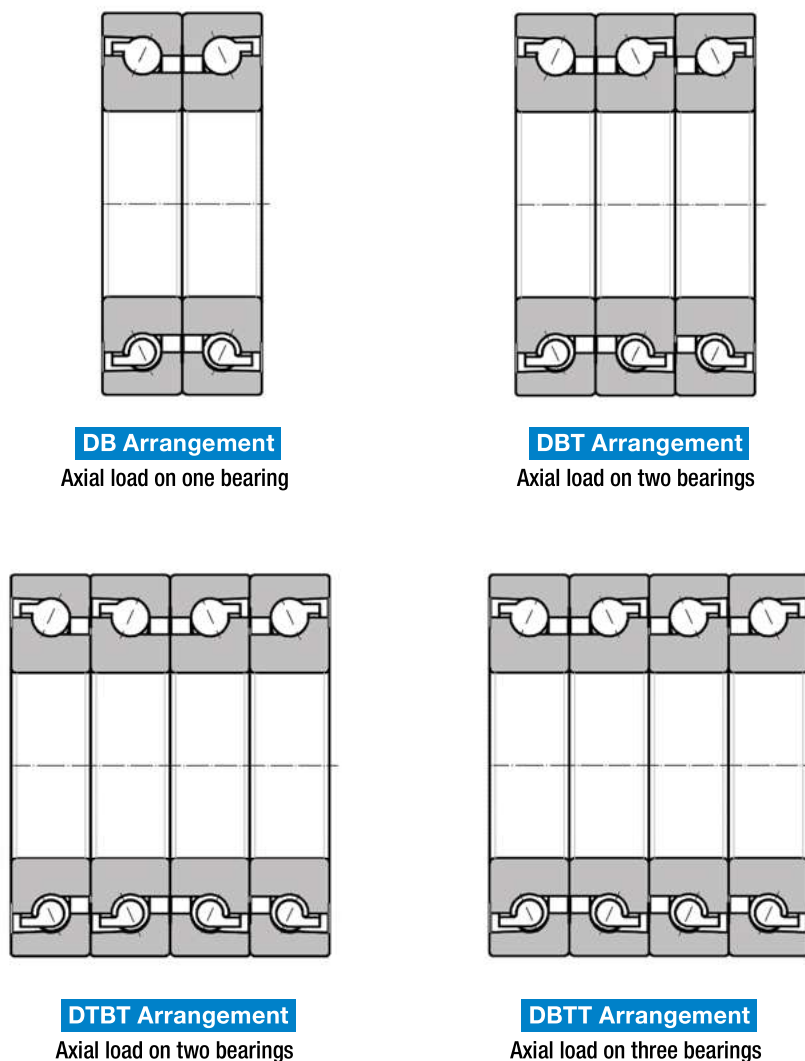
\_\_\_ Bearing arrangement NTN Angular contact ball bearings BST
